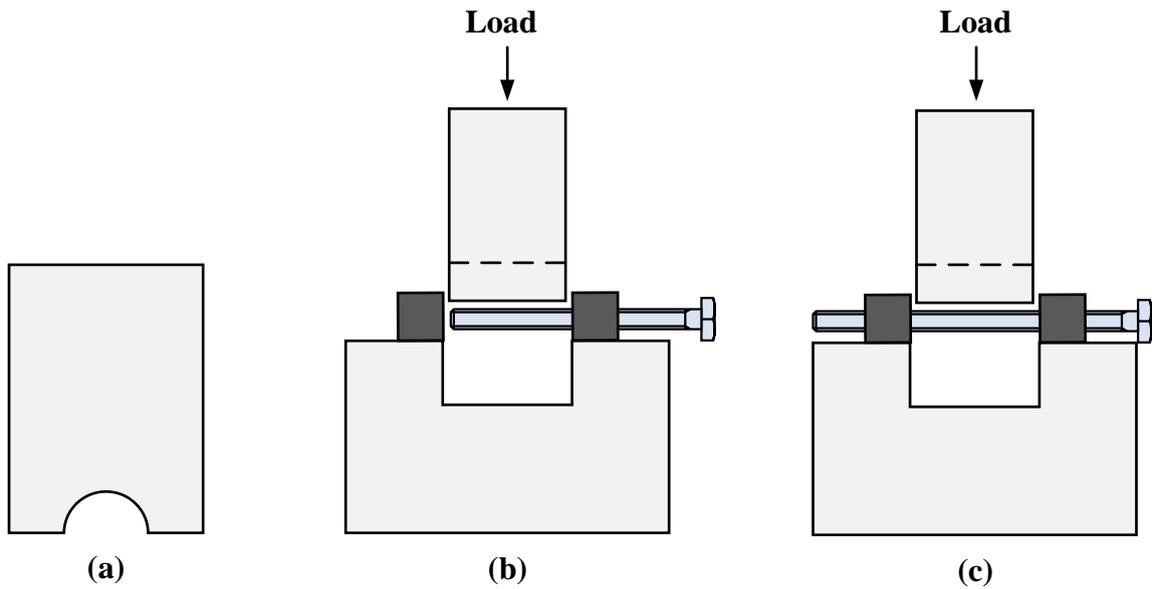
Schematic representation of Johnson shear tool, (a) Shear cutter, (b) Single shear and (c) Double shear.
